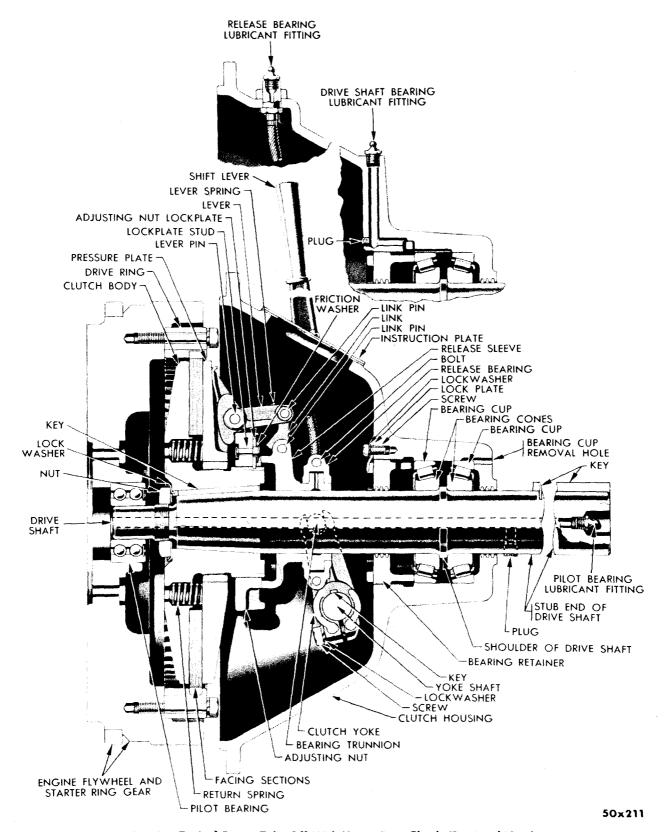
Typical Power Take-Off With Heavy Duty Clutch (Sectional View)
